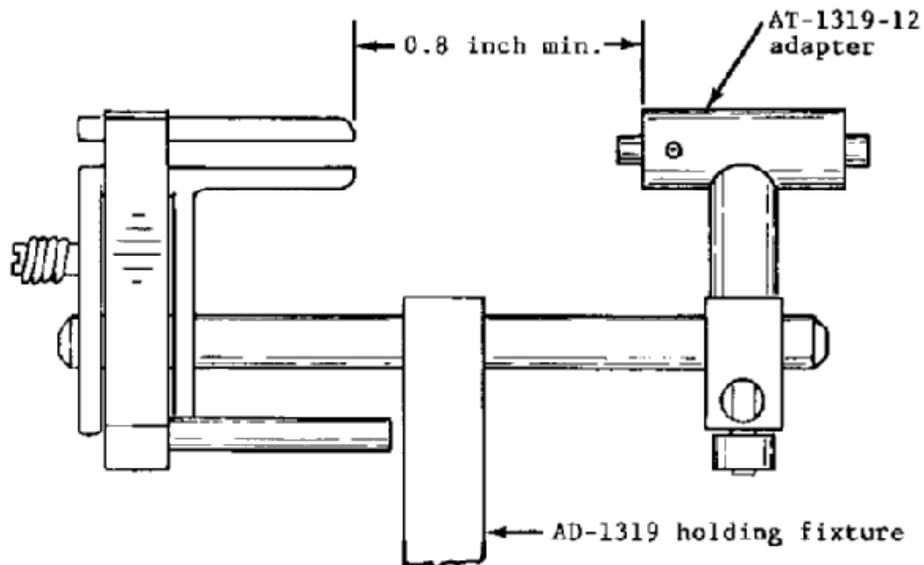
Setup Dimensions for AD-1319 Holding Fixture
